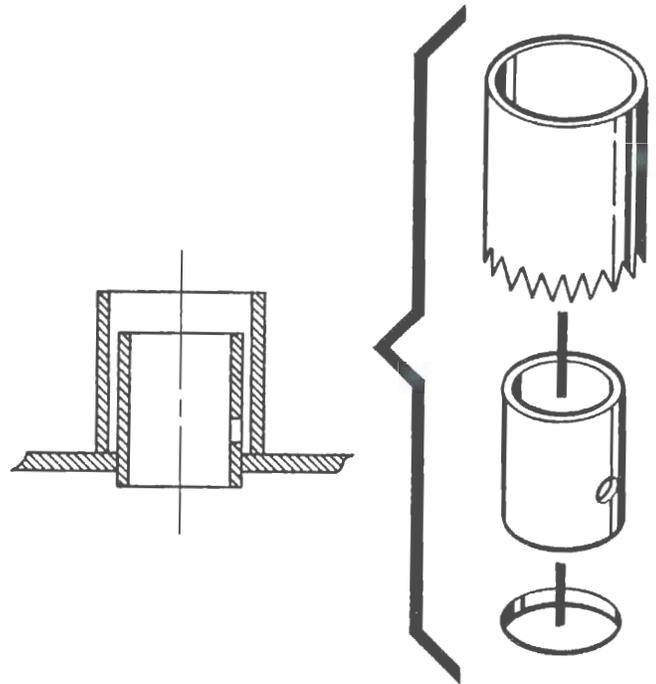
Detail of the drain showing a standpipe with a draw down hole and a venturi to cause the water to be drawn off the tank bottom.
